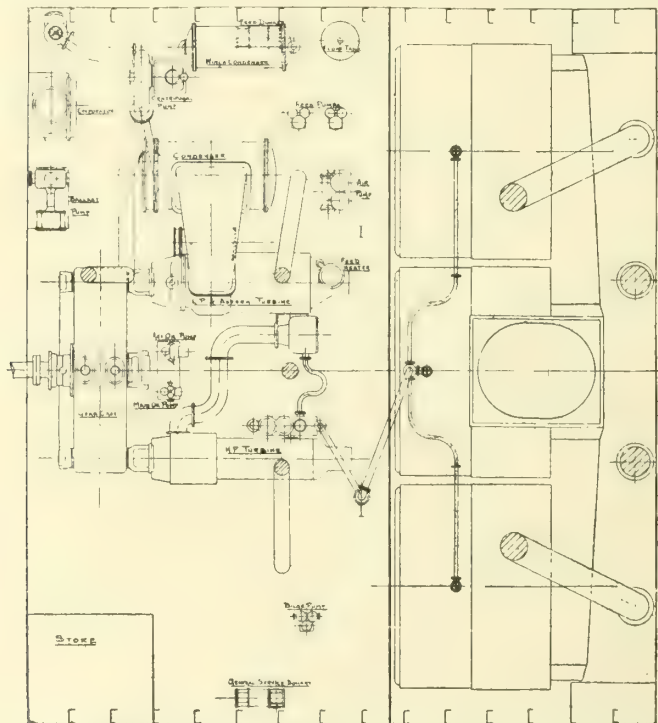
ARRANGEMENT OF GEARED TURBINE MACHINERY, S.S. "CAIRNROSS."
